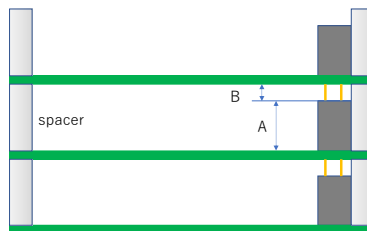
PC-104 Style stacking condition (A=11.05mm)
